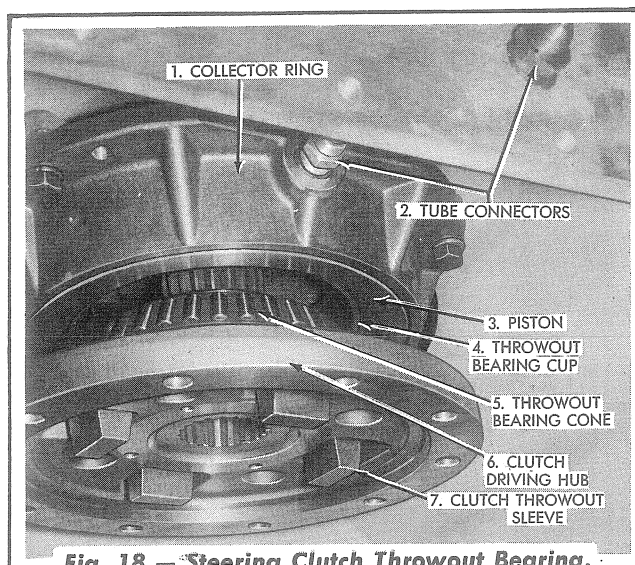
Steering Clutch Throwout Bearing, Throwout Sleeve, and Driving Hub on Bevel Gear Shaft
